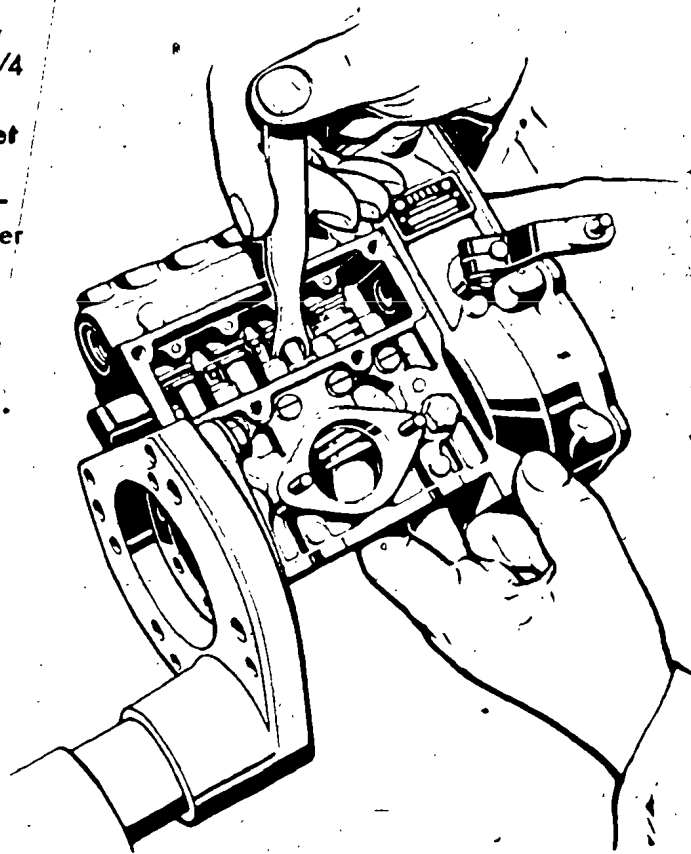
Removing the upper spring seat by using mounting lever EFEP 307
